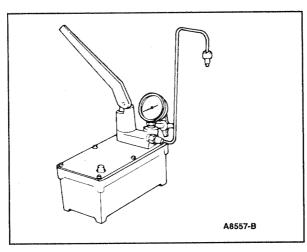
Rotunda 014-00300 Injector Nozzle Tester Special Service Tool D83T-9000-F
